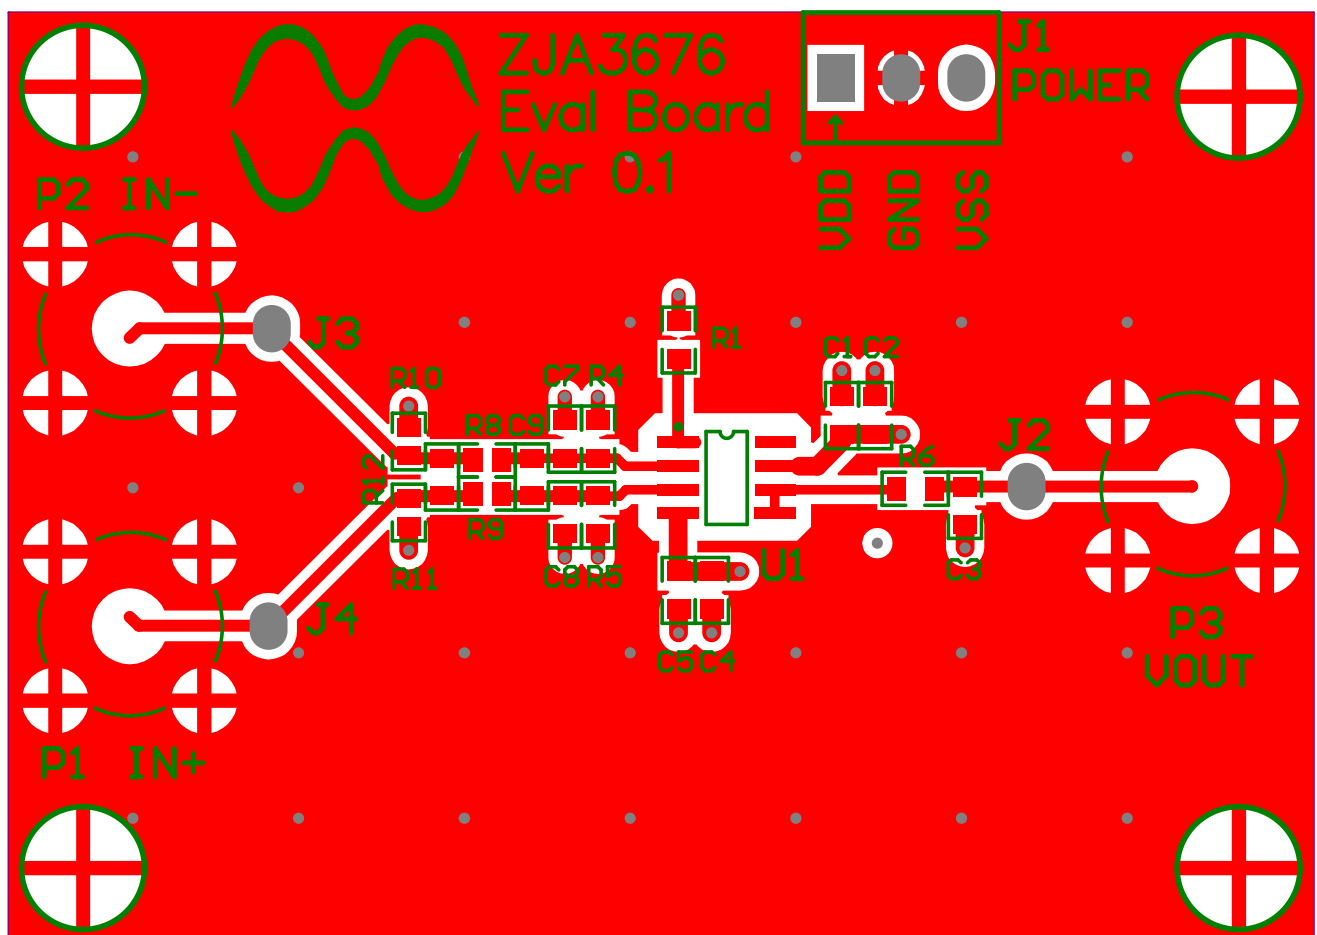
Layout of ZJA3676 Evaluation Board (Top Layer)
